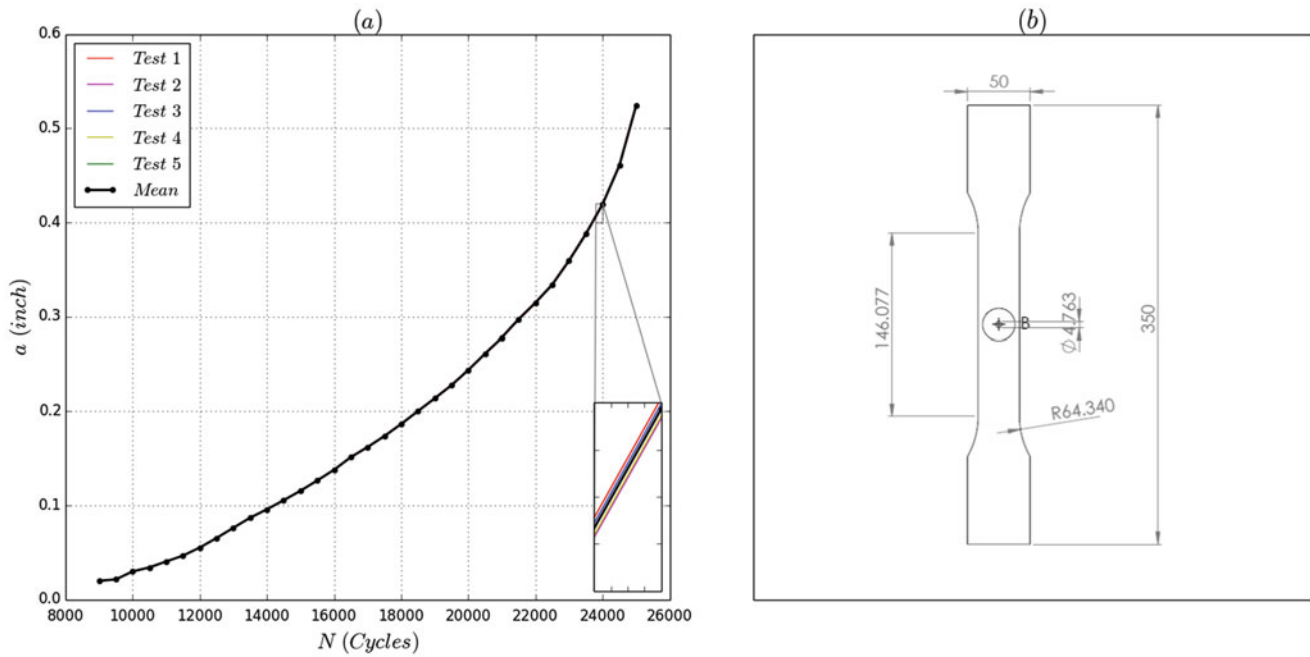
(a) Fatigue crack growth tests data, (b) standard Al7075-T6 tensile test specimen
